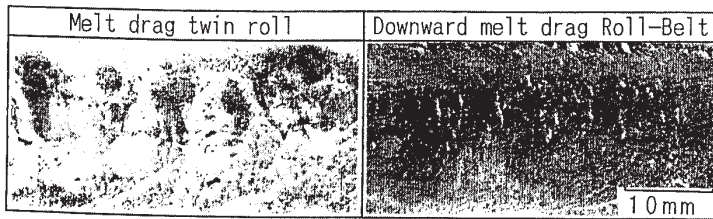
Forming roll surface of the strip cast by melt drag twin roll caster and downward melt drag caster.
